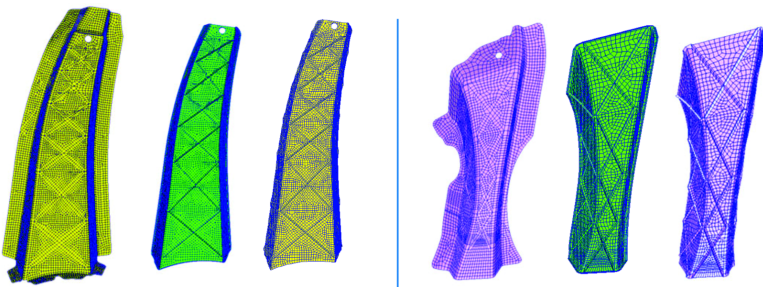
Design no. 5's FE models, 10-mm foam core sandwich with cross-shaped stamping carried out on inner skins. Left: lower C-pillar (outer skin, core, and inner skin) and right: upper C-pillar (outer skin, core, and inner skin).
